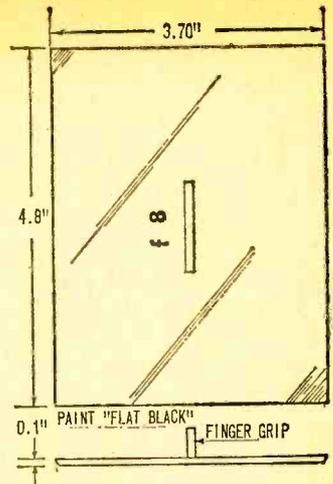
Right, dimensions for making masks. You should be able to determine best *f* stop at fixed exposure within four tests from any negative to make good print.
